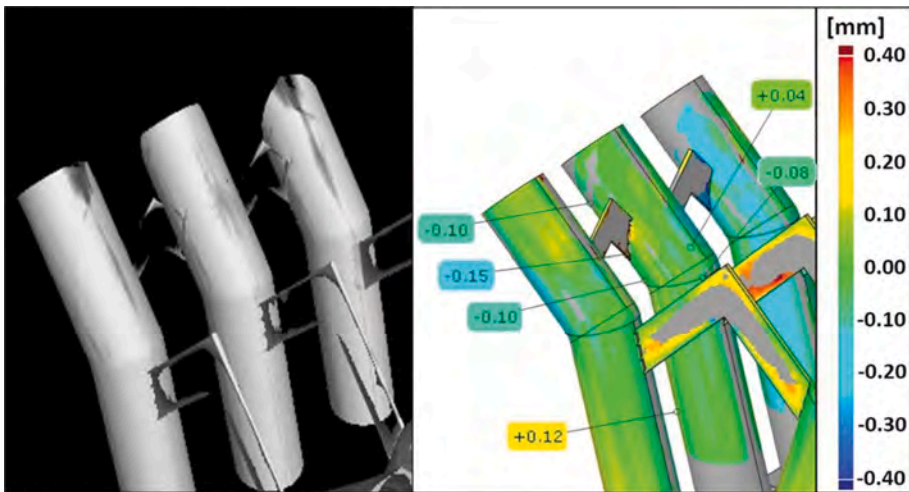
Geometric distortion analysis: a) Computed tomography scan of LPBF workpiece; b) dimensional control of LPBF workpiece.
